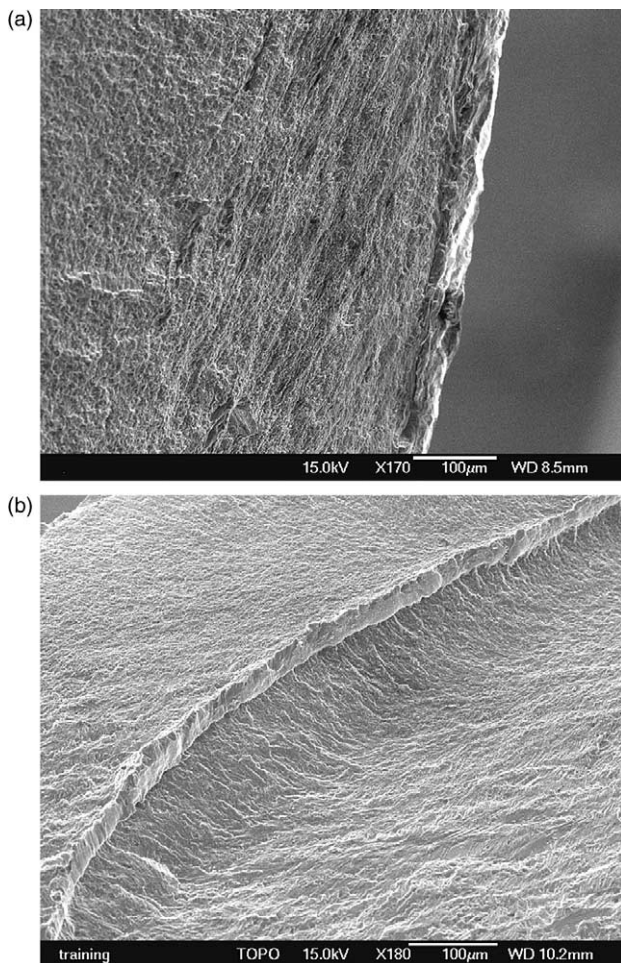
Fracture surfaces of the fatigue specimens broken after 0.4×10^6 (a) and 3×10^6 cycles (b).
